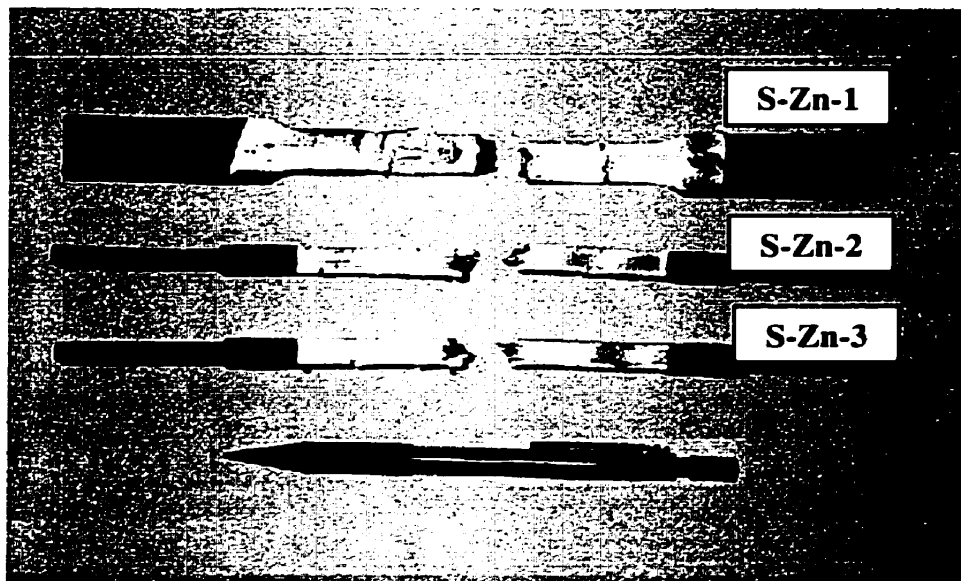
Failure of Zinc coated specimens (S-Zn-1,2,3)
